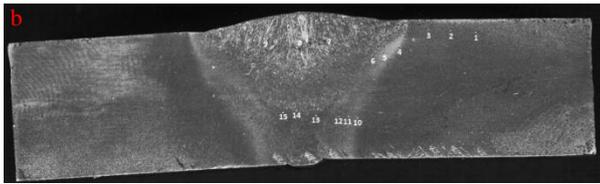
Location of indentation for Vickers hardness test, GMAW weld joint (a); MCAW weld joint (b)
